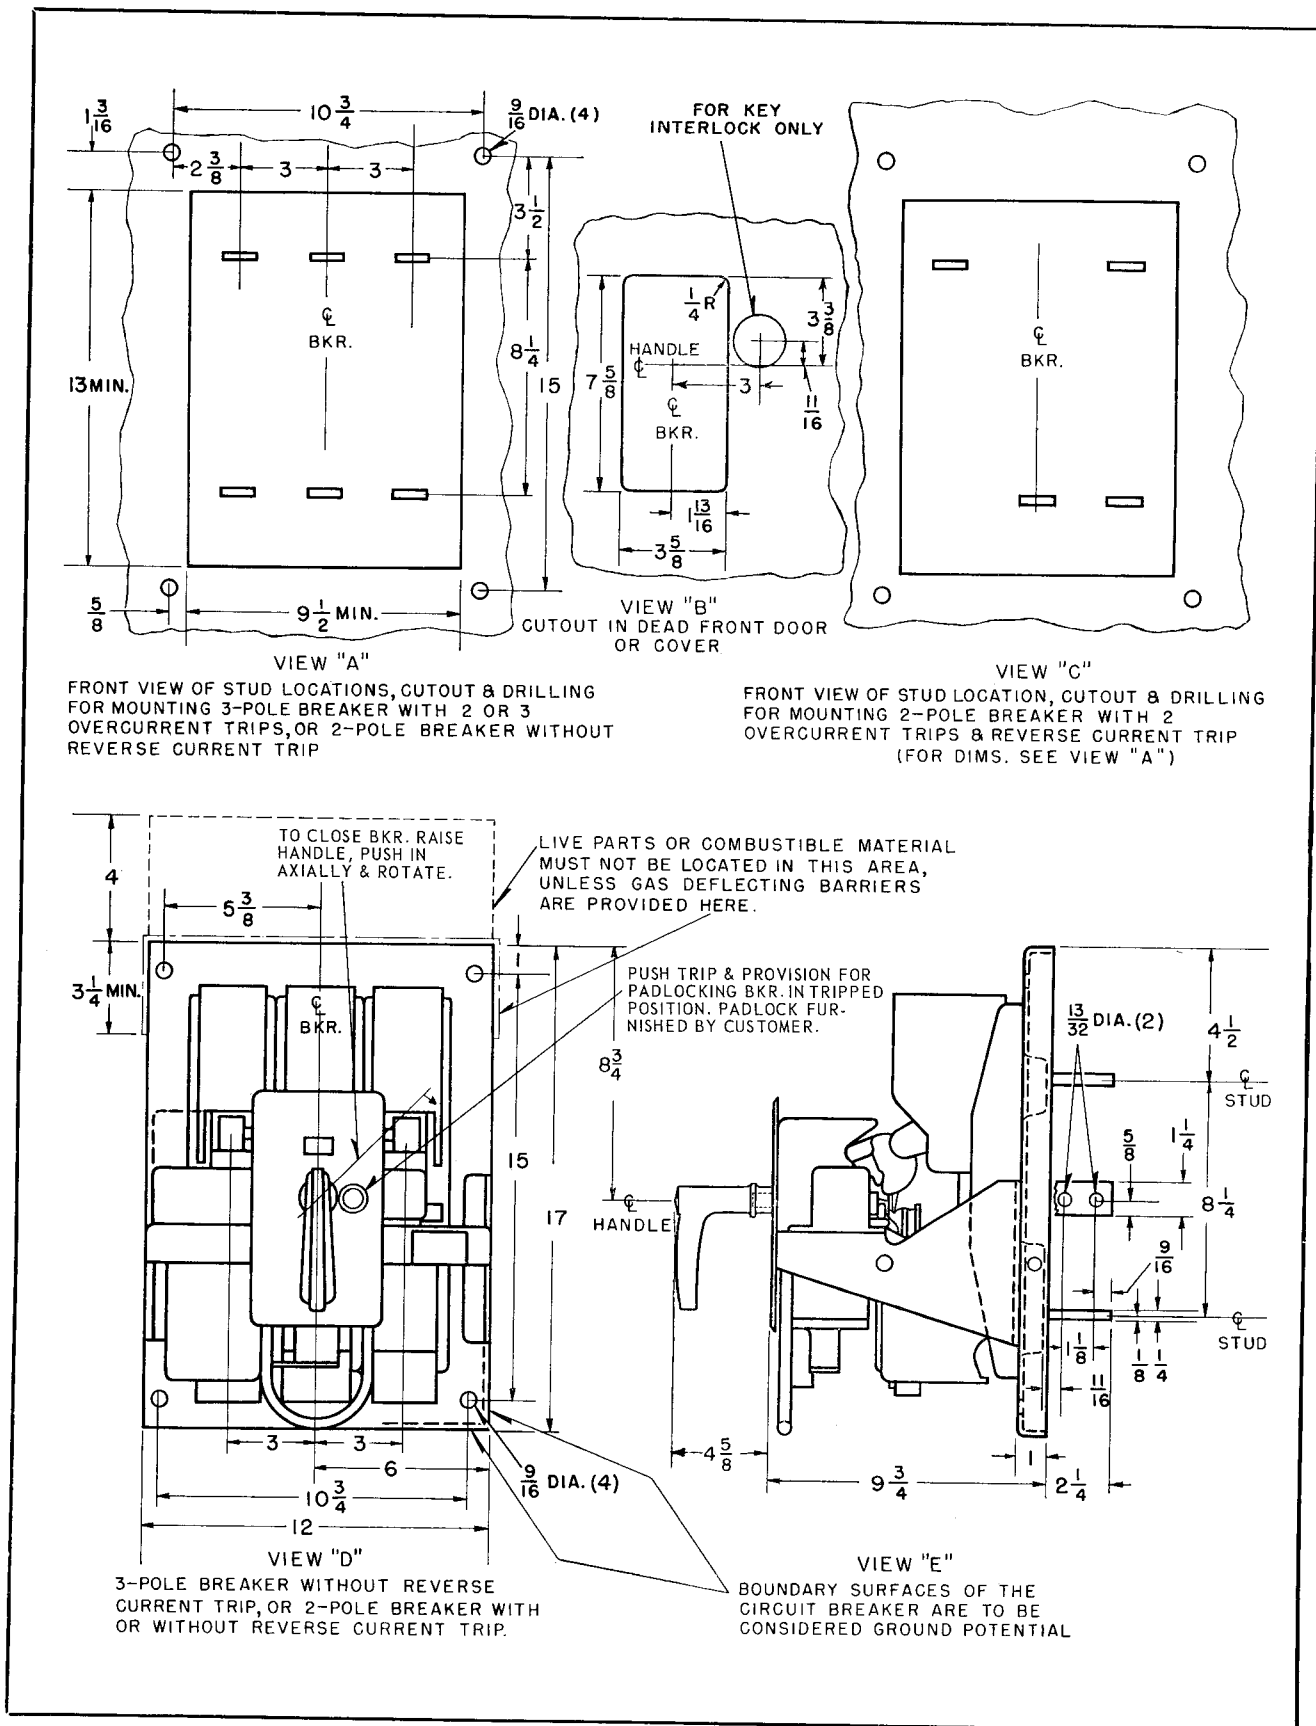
DB-15 Outline Dimensions and Mounting Details
